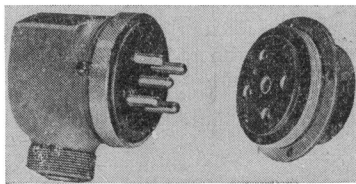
Type-AF 90-degree-angle plug, with pin insert assembly, and opposite, type-AF wall-mounting receptacle, with socket insert assembly
